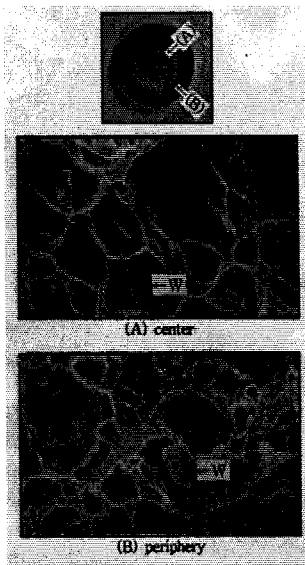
Tensile fracture surface(t1=1.0sec, P2=100MPa, ×2000)
